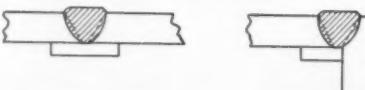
Single V-groove joints welded from one side with backing. Complete joint penetration is shown. These joints are satisfactory for material thicknesses to $\frac{3}{4}$ in.
